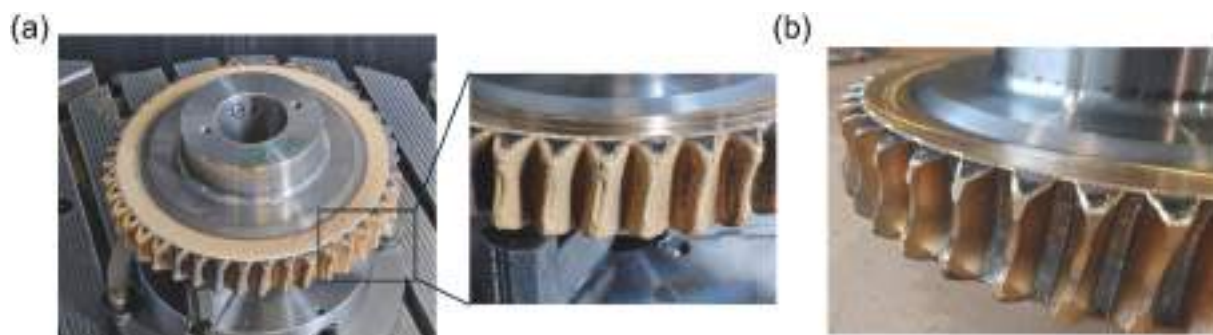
Worm gear deposited with bronze alloy deposited via L-DED (a) after the deposition process (b) after machining process post-deposition.
